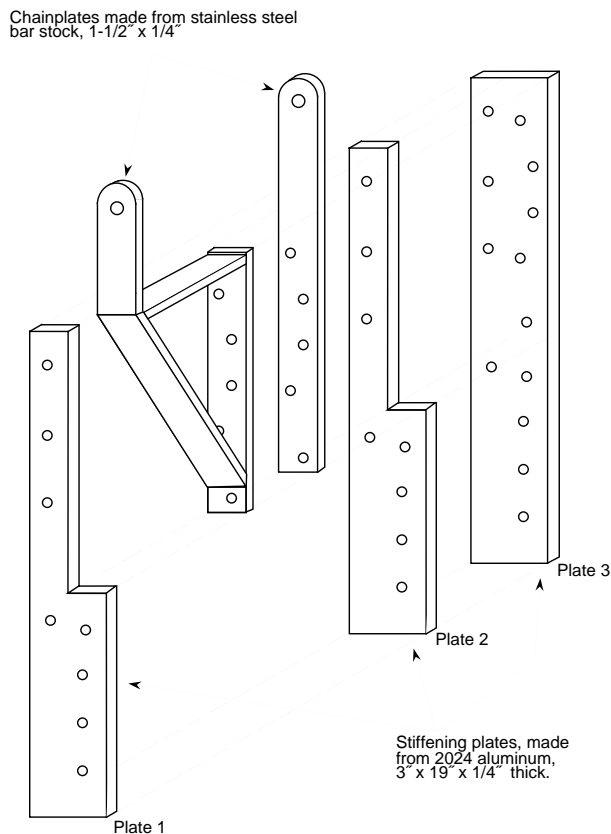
Exploded View of Chainplates and Stiffening Plates Used in 1980 Repair (Deck, bulkhead, bolts & nuts not shown)
